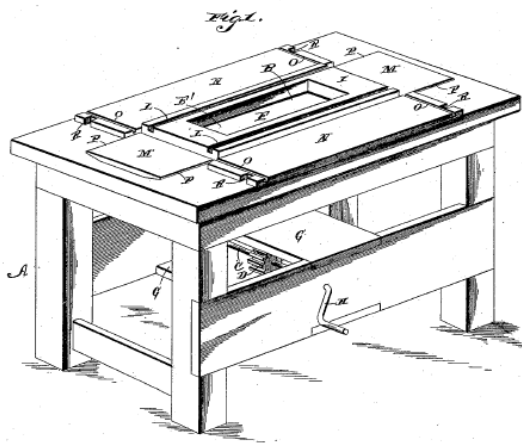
US Patent 375,377. Machine for Molding Building Blocks. 27 Dec 1887
